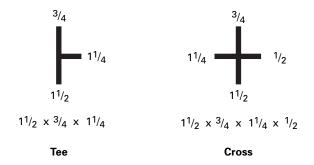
Method of Designating Outlets of Reducing Tees and Crosses (See para. 3.2)
